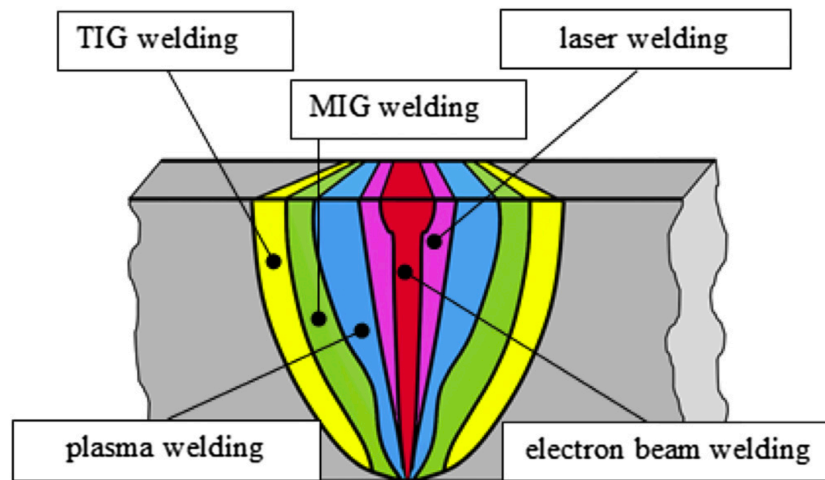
A comparison of weld size between different welding technique. TIG and metal inert gas (MIG) welding processes [13].
